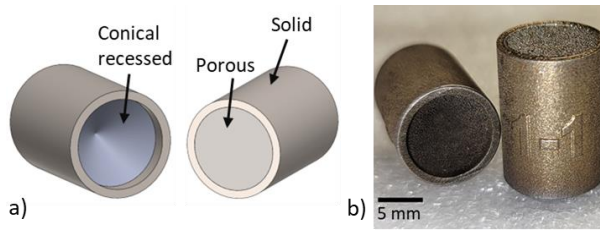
a) Wick sample CAD renderings, and b) 3DP wick samples.
